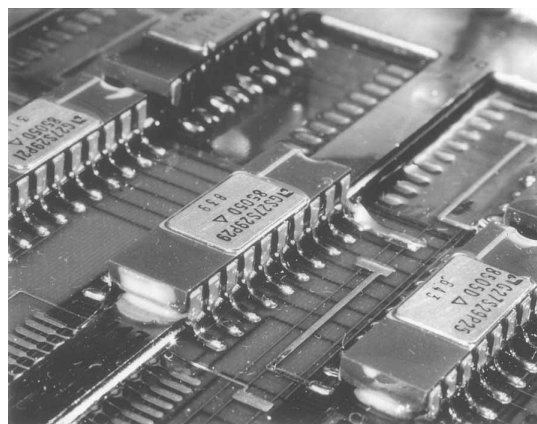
DIPs mounted over 0.060" copper heat sinks
